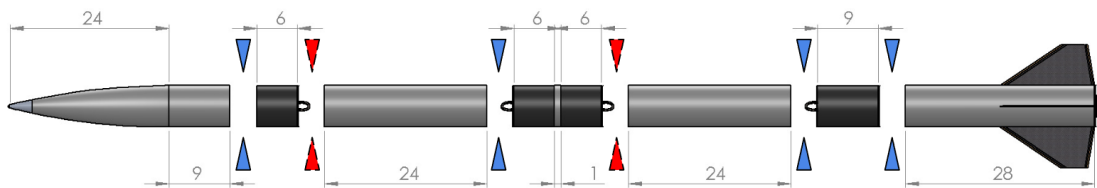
Dimensioned Rocket Sections [in]. In-flight Separation points (red and dashed). Non-in-flight separation points (blue and solid)
